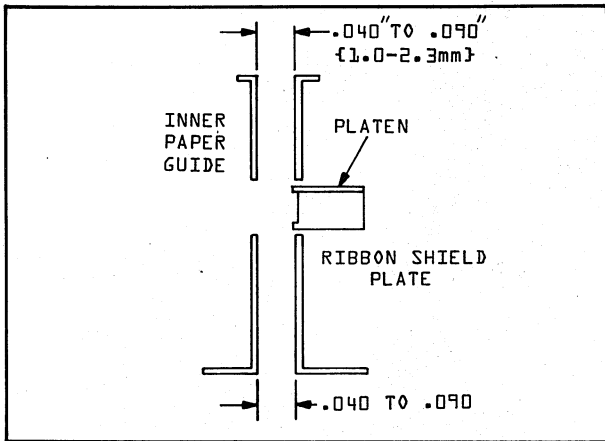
INNER PAPER GUIDE SET-UP
